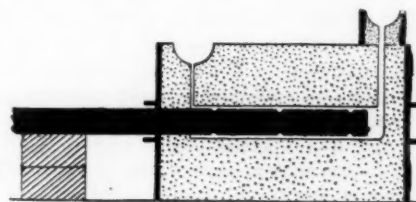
SECTION SHOWING METHOD OF CASTING-ON LINER TO ROD OF A RAM PUMP
